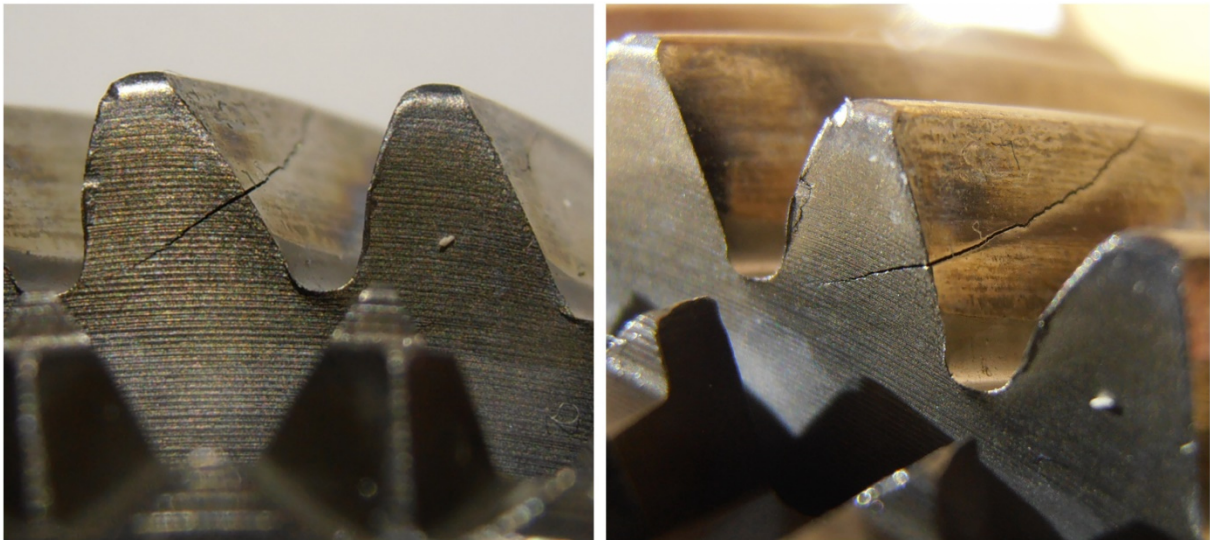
Tooth breakage of asymmetric rolled PM gear with ground coast flanks after 1,5 hours.
